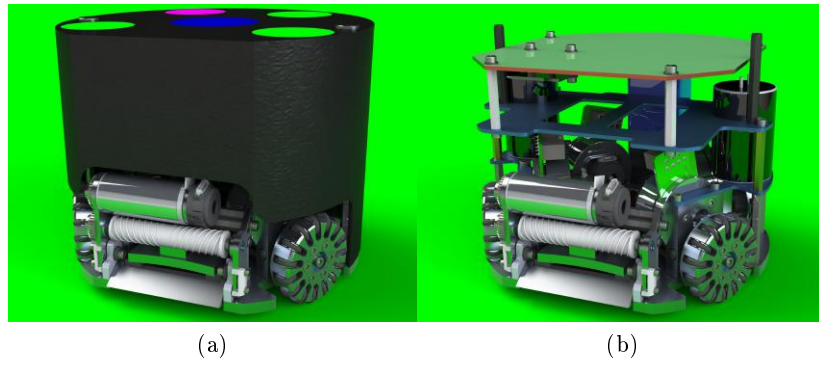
ITAndroids SSL second robot mechanical assembly.
